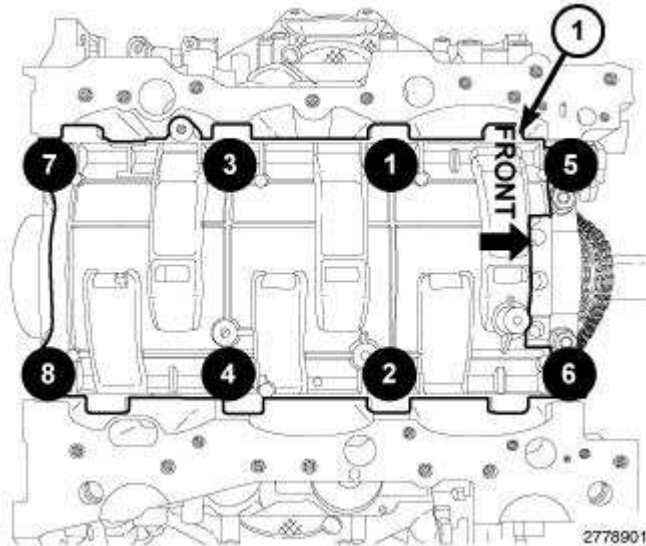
Windage Tray With Main Bearing Cap Bolts Installation Sequence
